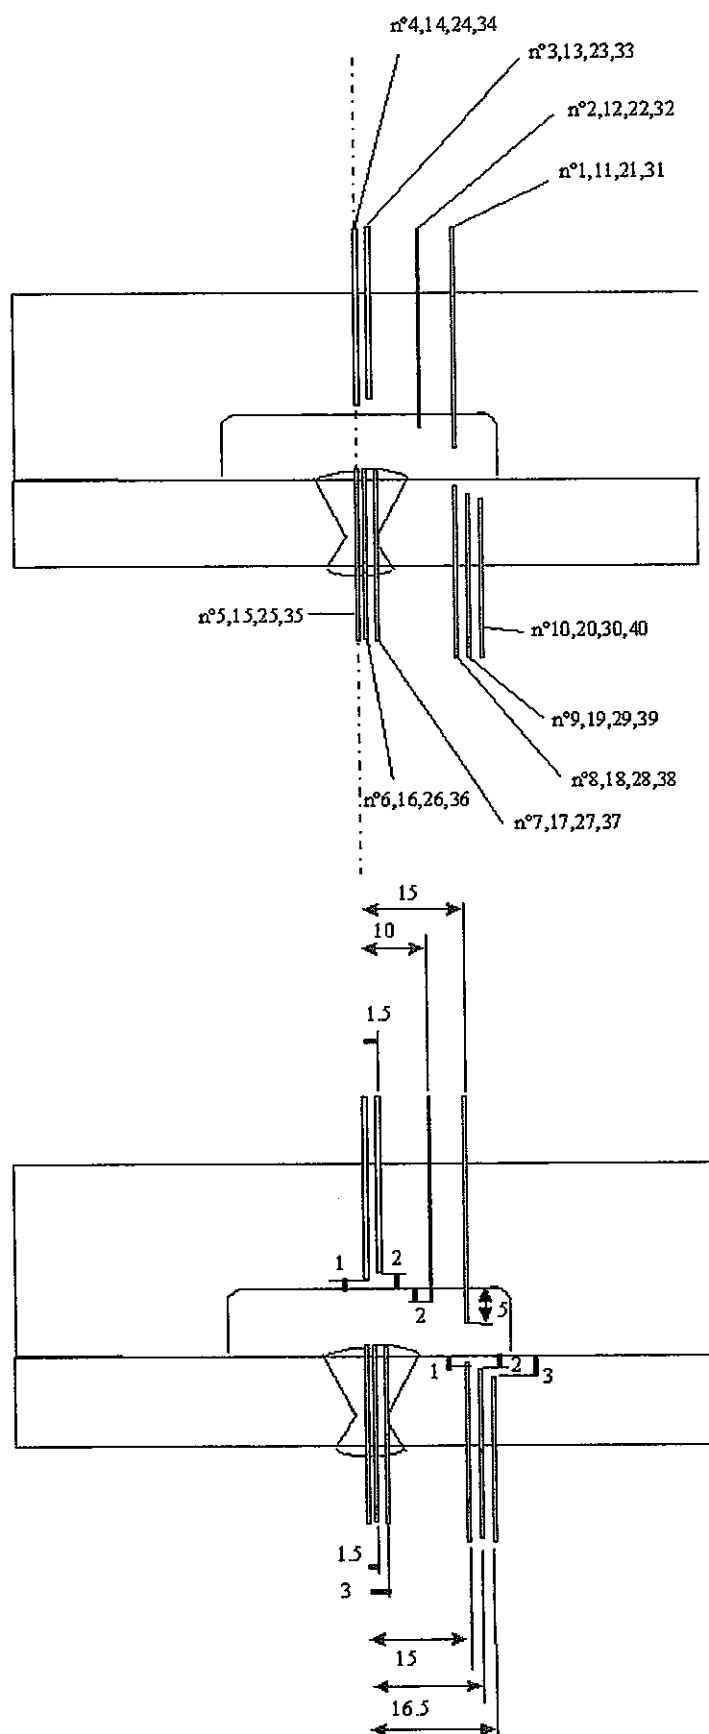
Plate of 316L steel (VIRGO) with weldment, details of thermocouple locations
